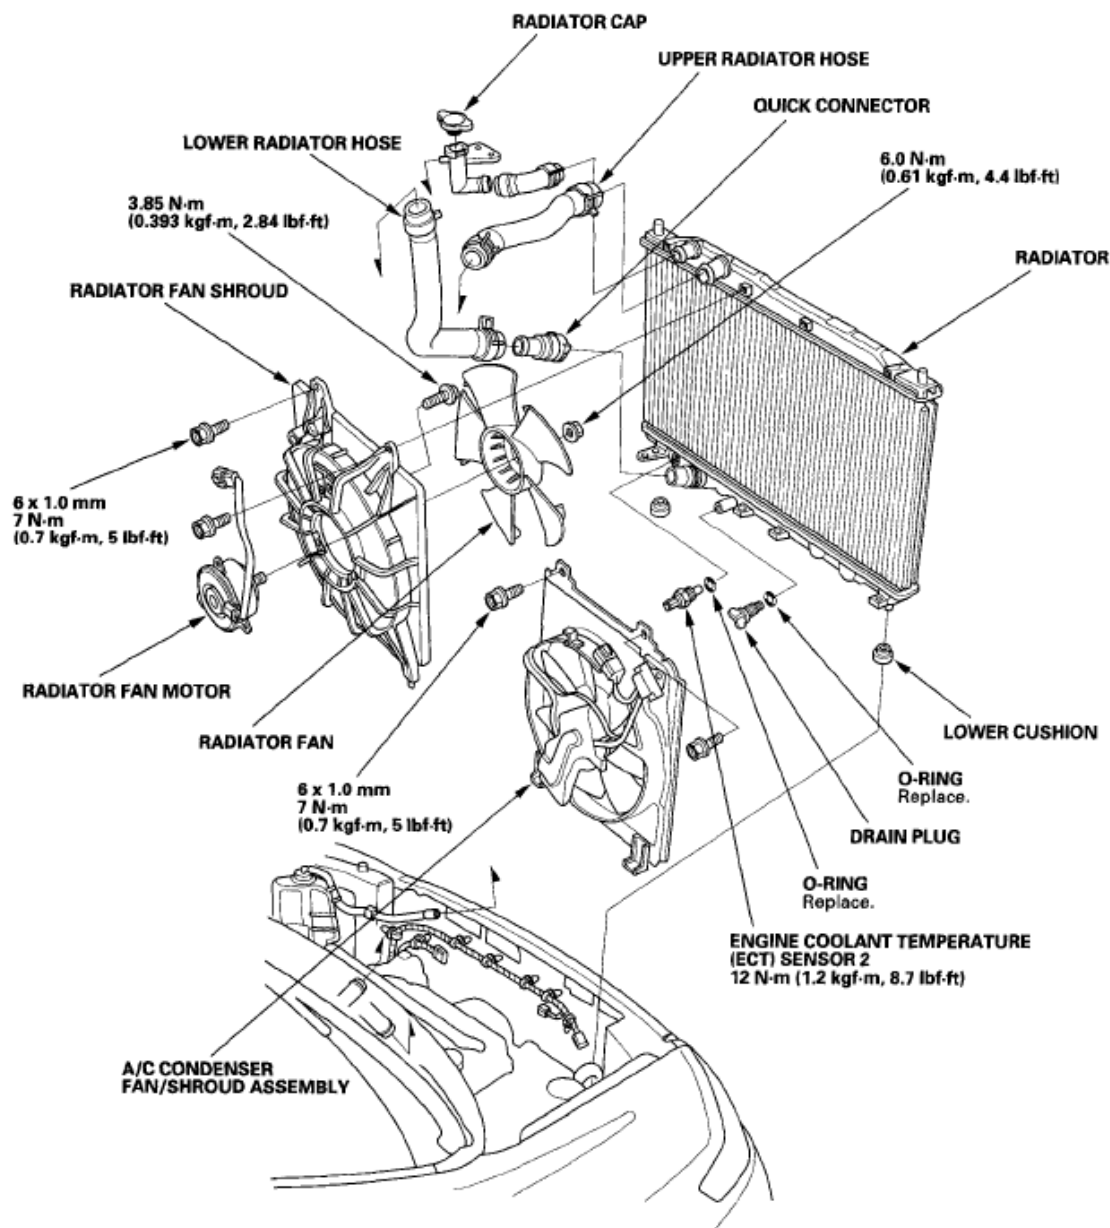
Identifying Radiator And Fan Components - DENSO - With Tightening Torque
